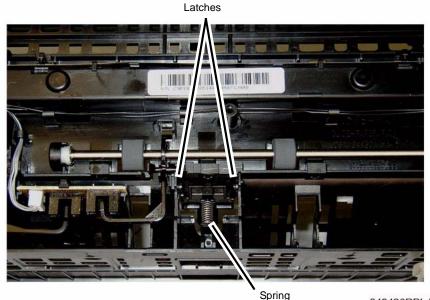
Feed Rolls Assembly Removal (Top View)
